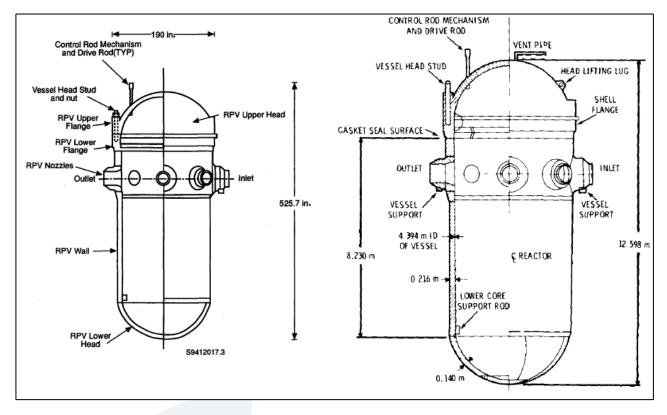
RPV Outline and Reference Dimensions [Ref. 48]
